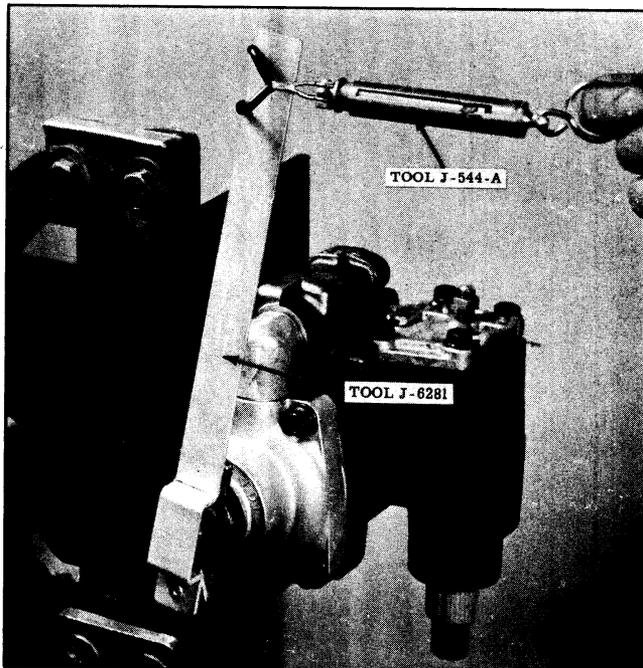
Checking Ball Nut and Thrust Bearing Preload
